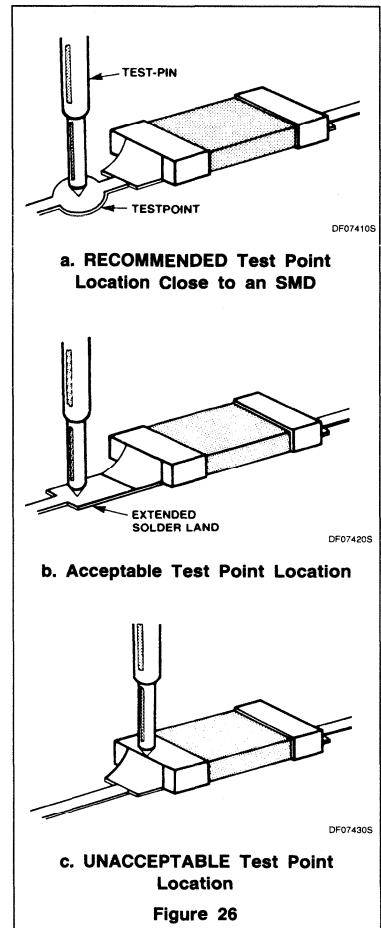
shows the recommended approach for positioning test-points in tracks close to components, and Figure 26b shows an acceptable (though not recommended) alternative where the solderland is extended to accommodate the test pin. This latter method avoids sacrificing too much board space, but can introduce the problem of components moving ("floating") when reflow-soldered. The approach shown in Figure 26c is totally unacceptable since the pressure applied by the test pin can make an open-circuit soldered joint appear to be good, and, more importantly, the test pin can damage the metallization on the component, particularly with small SMDs.
